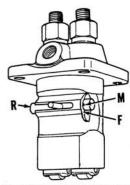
When performing injection limiter adjustment on all models except 3HM, use governor lever to align center mark (M) on fuel rack (R) with injection pump reference face (F). See text for adjustment procedure.
